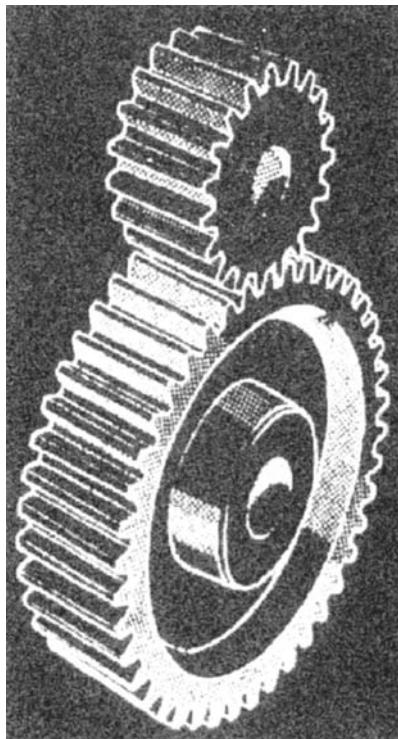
Spur gears. (Courtesy of Lubrizol Corp.)
